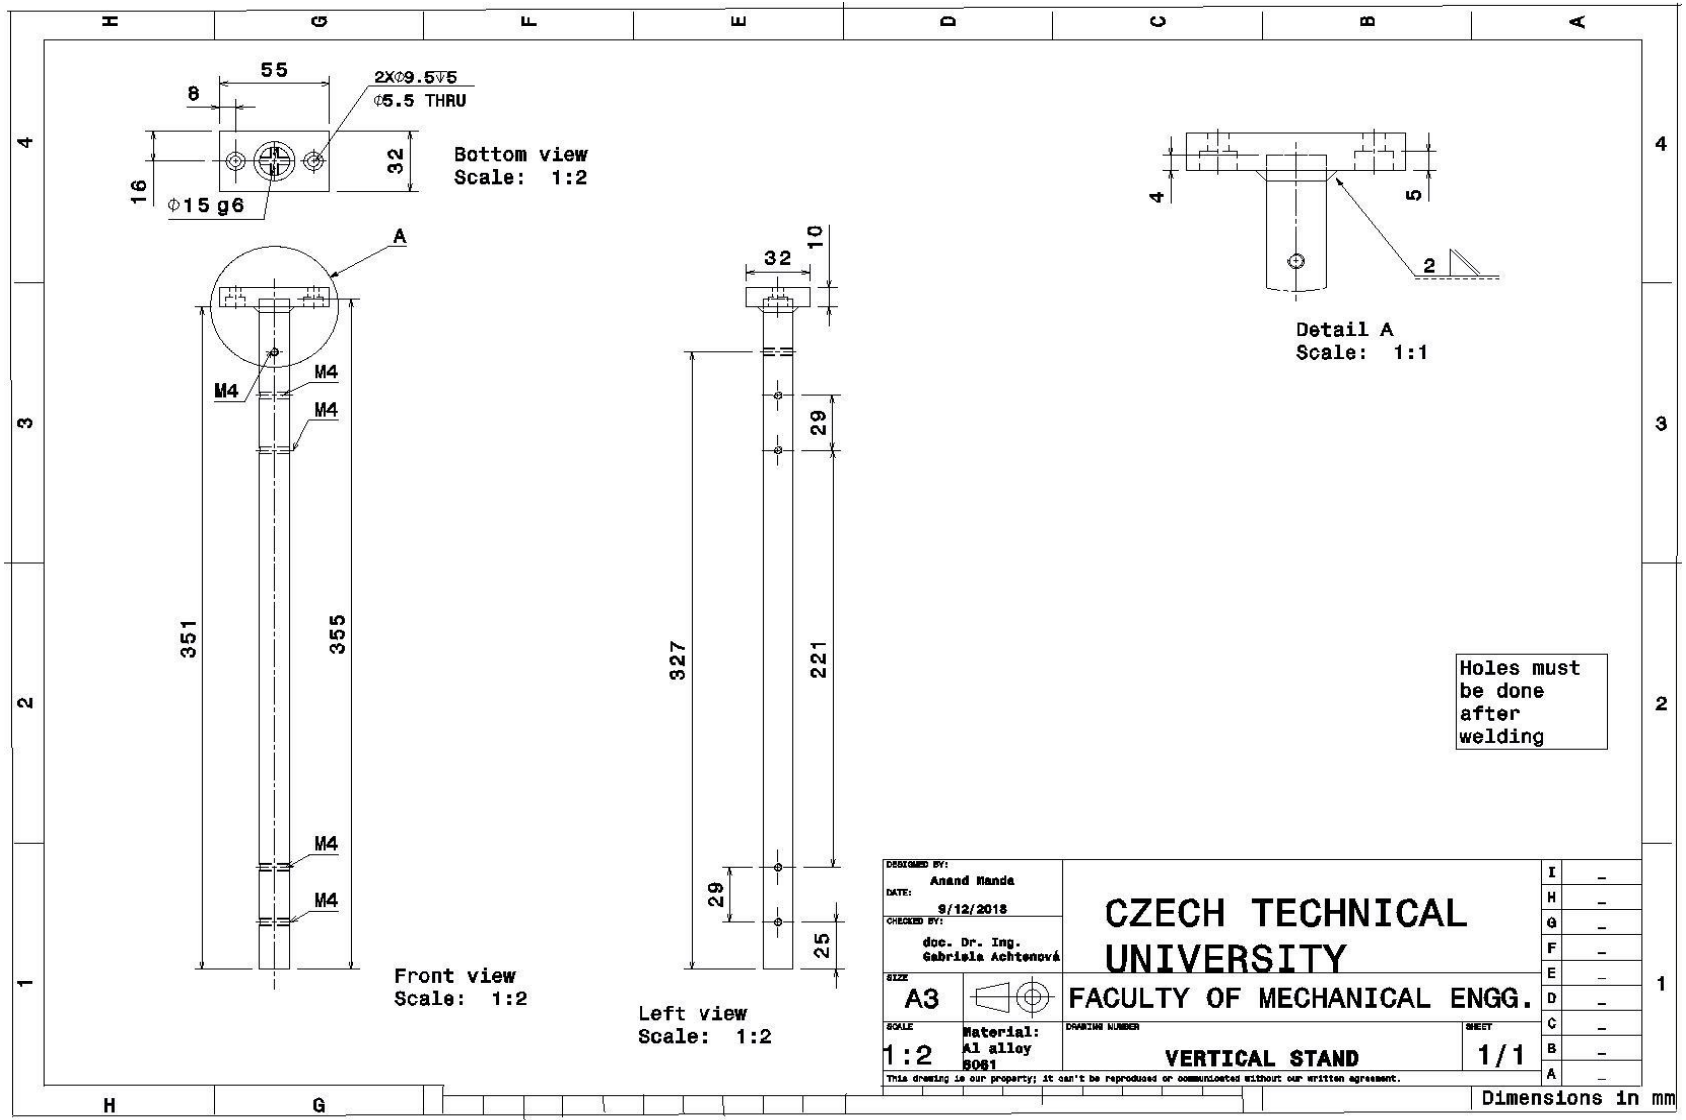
Sensor stand 2<sup>nd</sup> (sensor stand)
